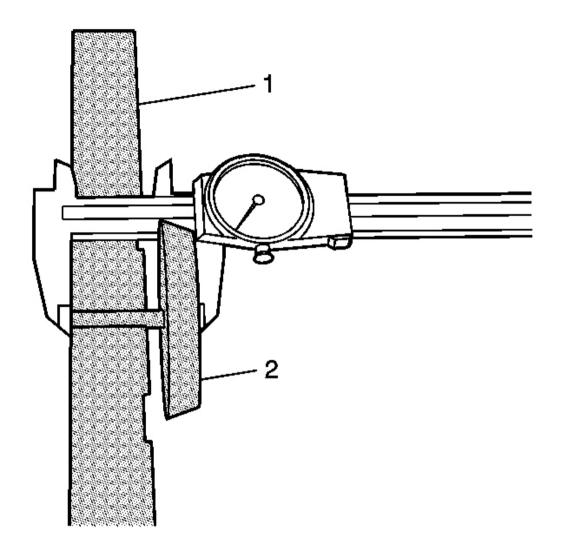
Measuring Overall Height Of J 44388-1 & J 44388-2 Courtesy of GENERAL MOTORS CORP.
